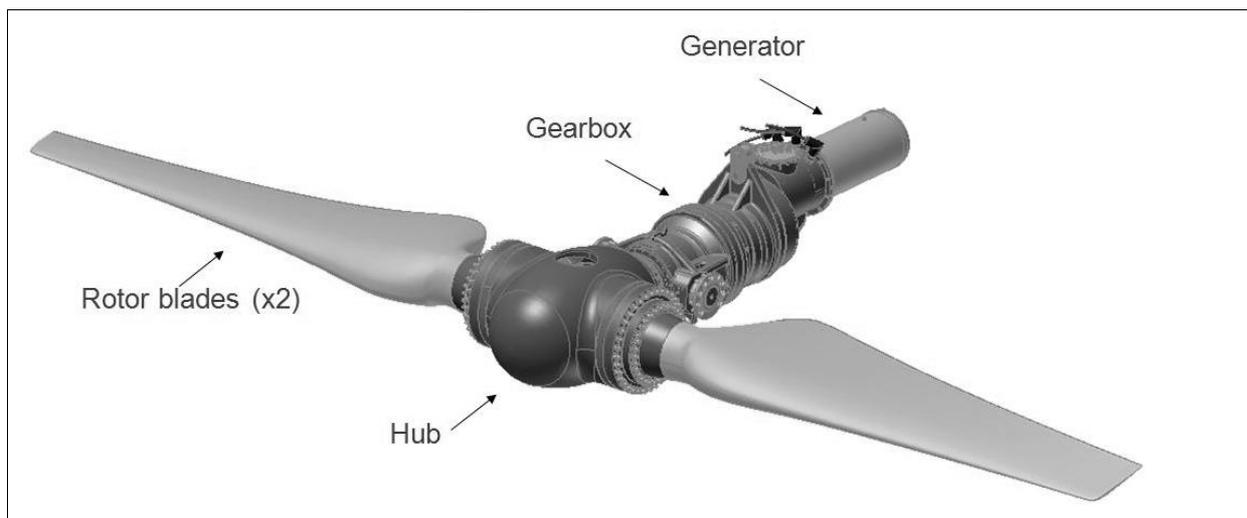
the SeaGen power train showing the rotor, gearbox and generator assembly
